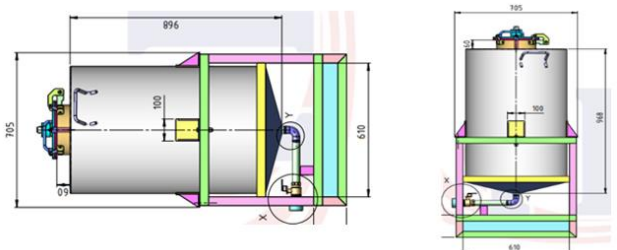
Illustration Of Tank Welding With 1G And 2G Positions
